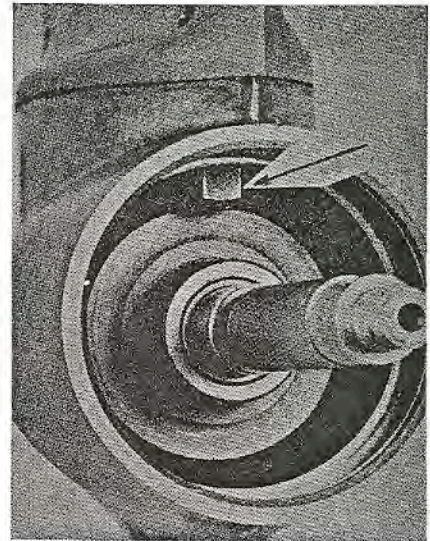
Lower unit gearcase with propeller shaft bearing cage removed. Stud nut (arrow) must be removed before gearcase can be detached from driveshaft housing.
